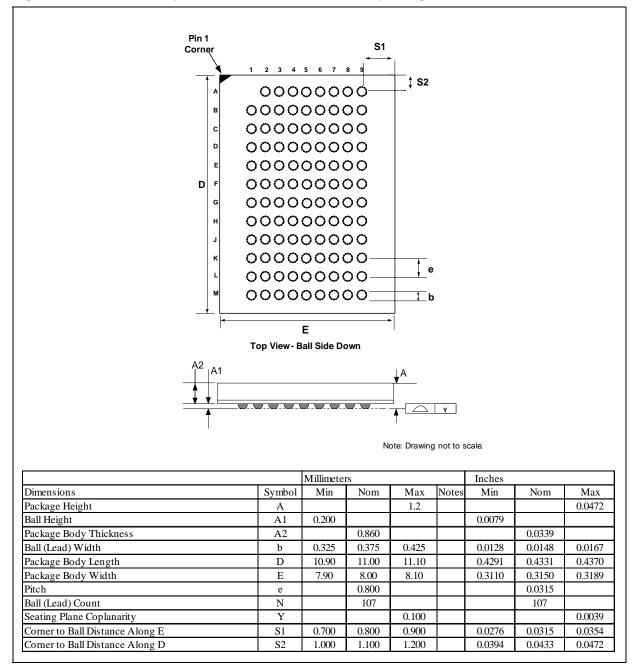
Mechanical Specifications: x16C (107-ball) package (8x11x1.2 mm)
